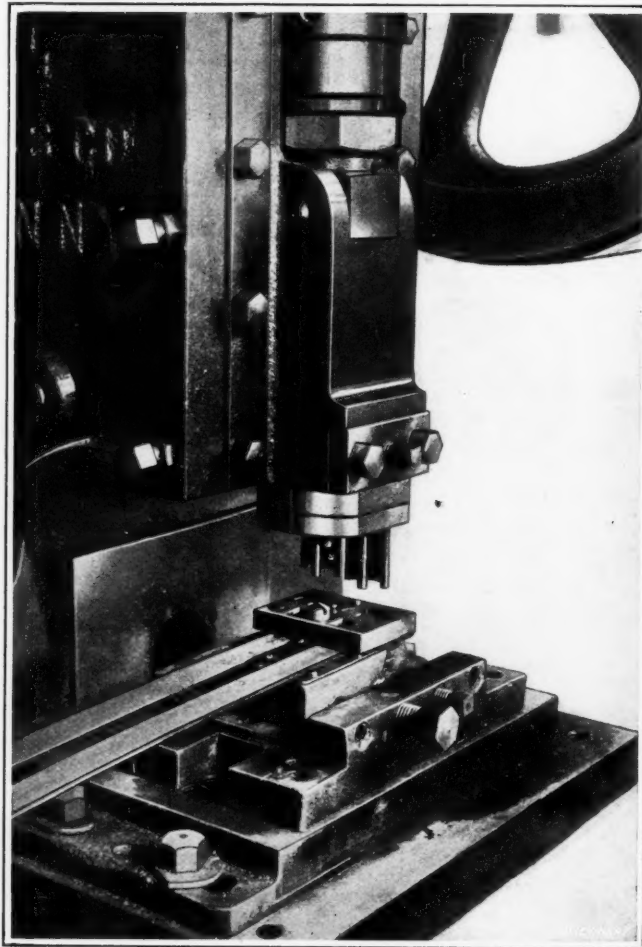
Close View of Die used on E. W. Bliss Press to punch One End of Two Blades at Each Stroke
